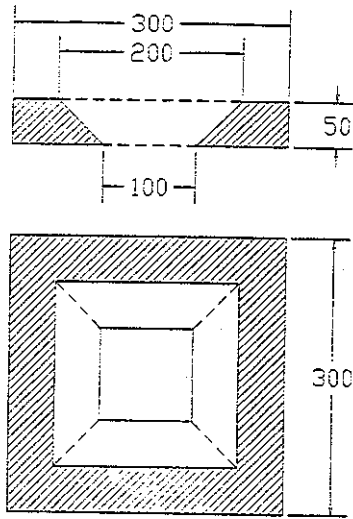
CAD drawing of the geometry of the valve seat to be simulated
